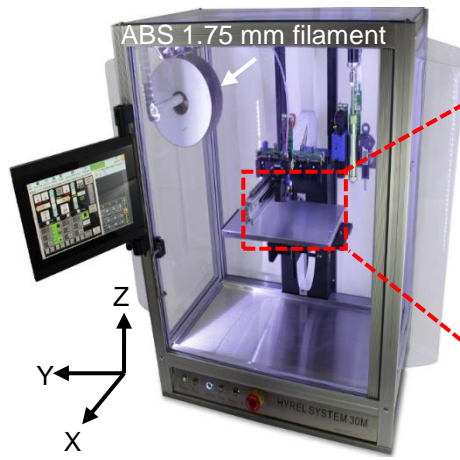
Hyrel 30M fused deposition modeling (FDM) machine.
